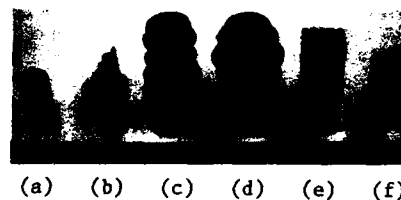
Forming samples, (a) specimen (b) flat plate with fins (c) fin type A (d) fin type B (e) spline type (f) screw type.
